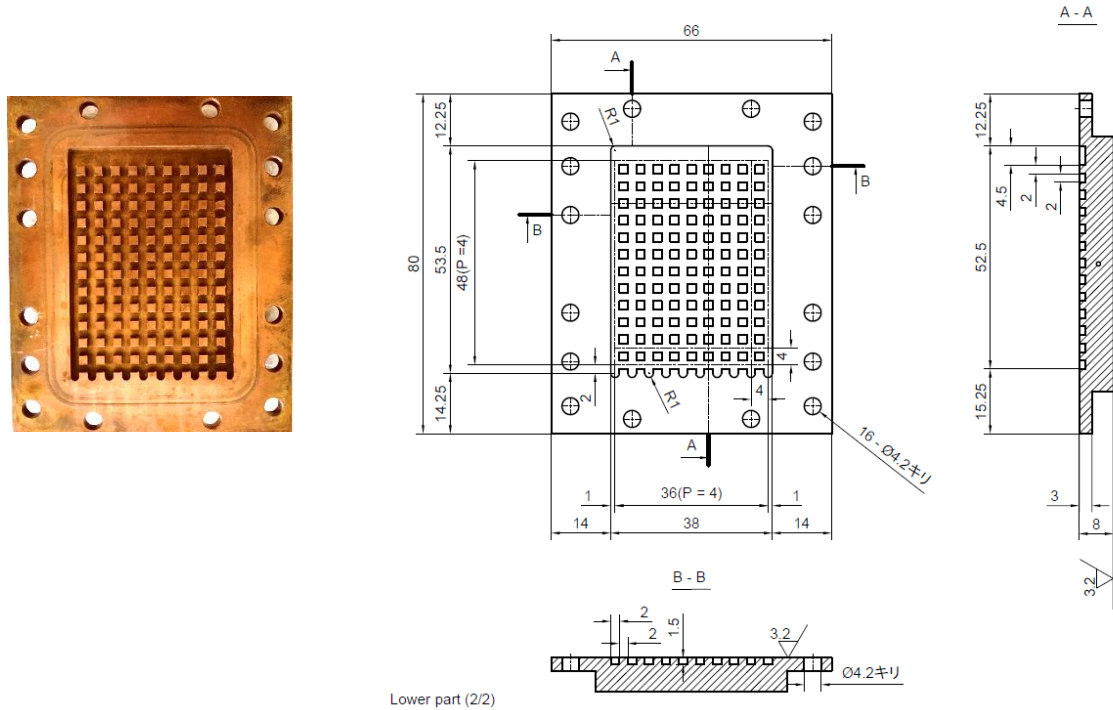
The fin and vapor grooves machined on the evaporator base
